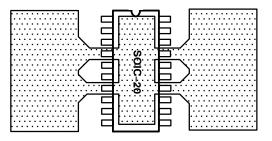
Example of SOIC-20 PCB Ground Plane Layout (preferred layout at top and bottom)
